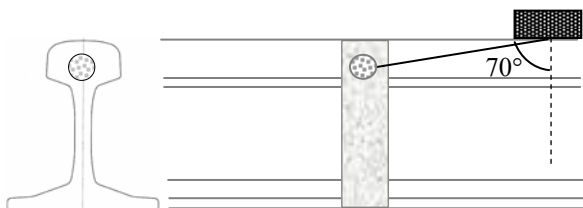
Positioning of the probes for testing the weld of a rail head according to European and British standards [4]
